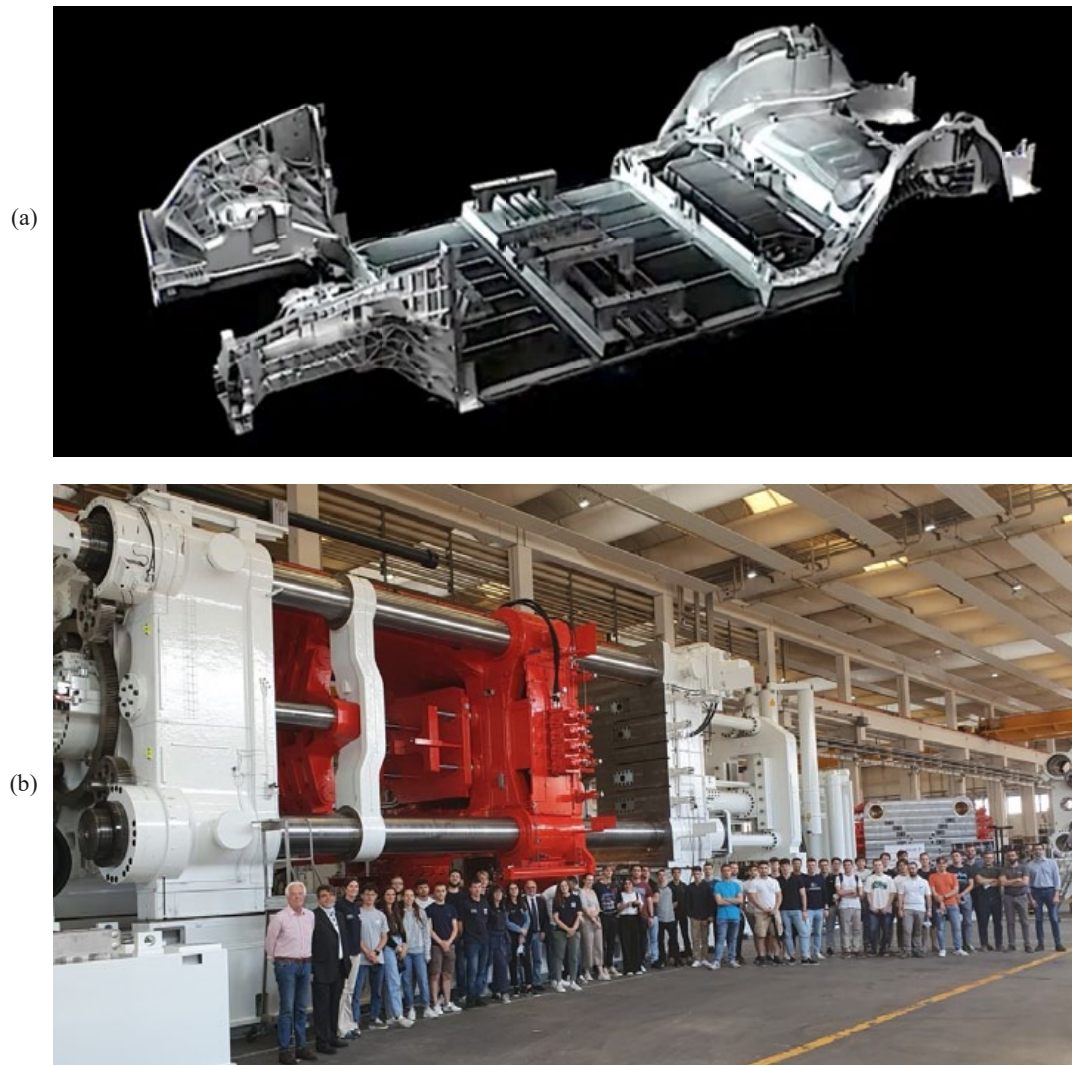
A megacasting of the chassis for the Tesla Model 3 electric car, manufactured by die casting from an aluminum alloy (a). Production of this component on a Giga Press die-casting machine with a clamping force of 6,000 tons from the Idra Group (Brescia, Italy) (b) made it possible to replace approximately 70 separate parts with a single casting.
